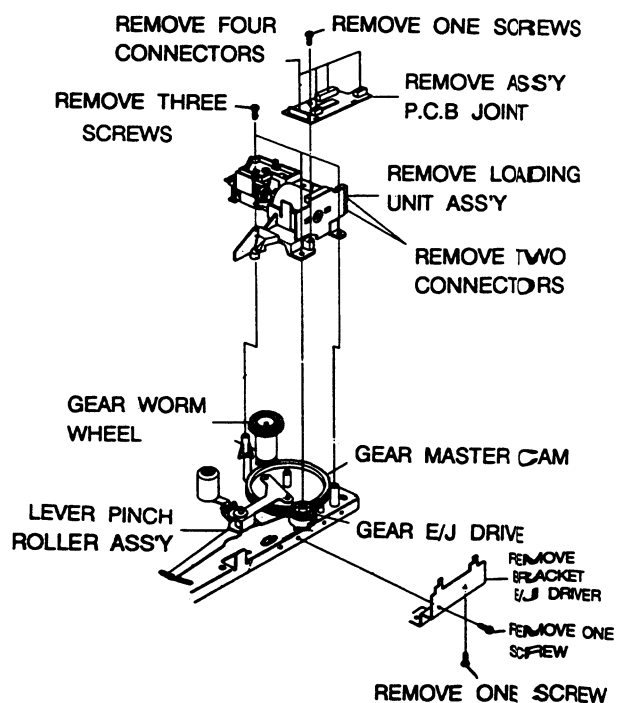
Loading Assembly and E/J Drive Bracket Removal
